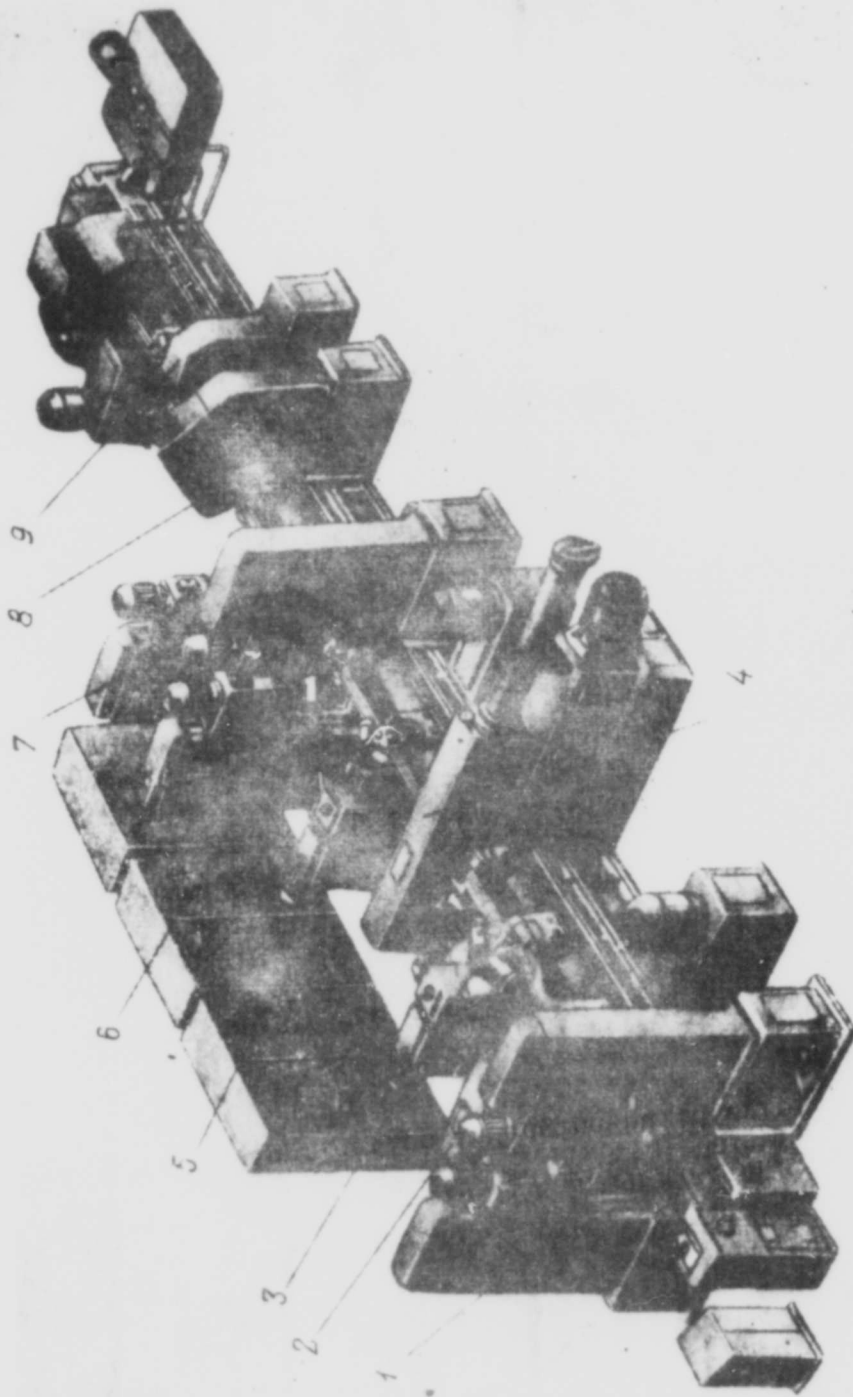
Transfer machine AL-1 for working root of compressor rotor blade.
